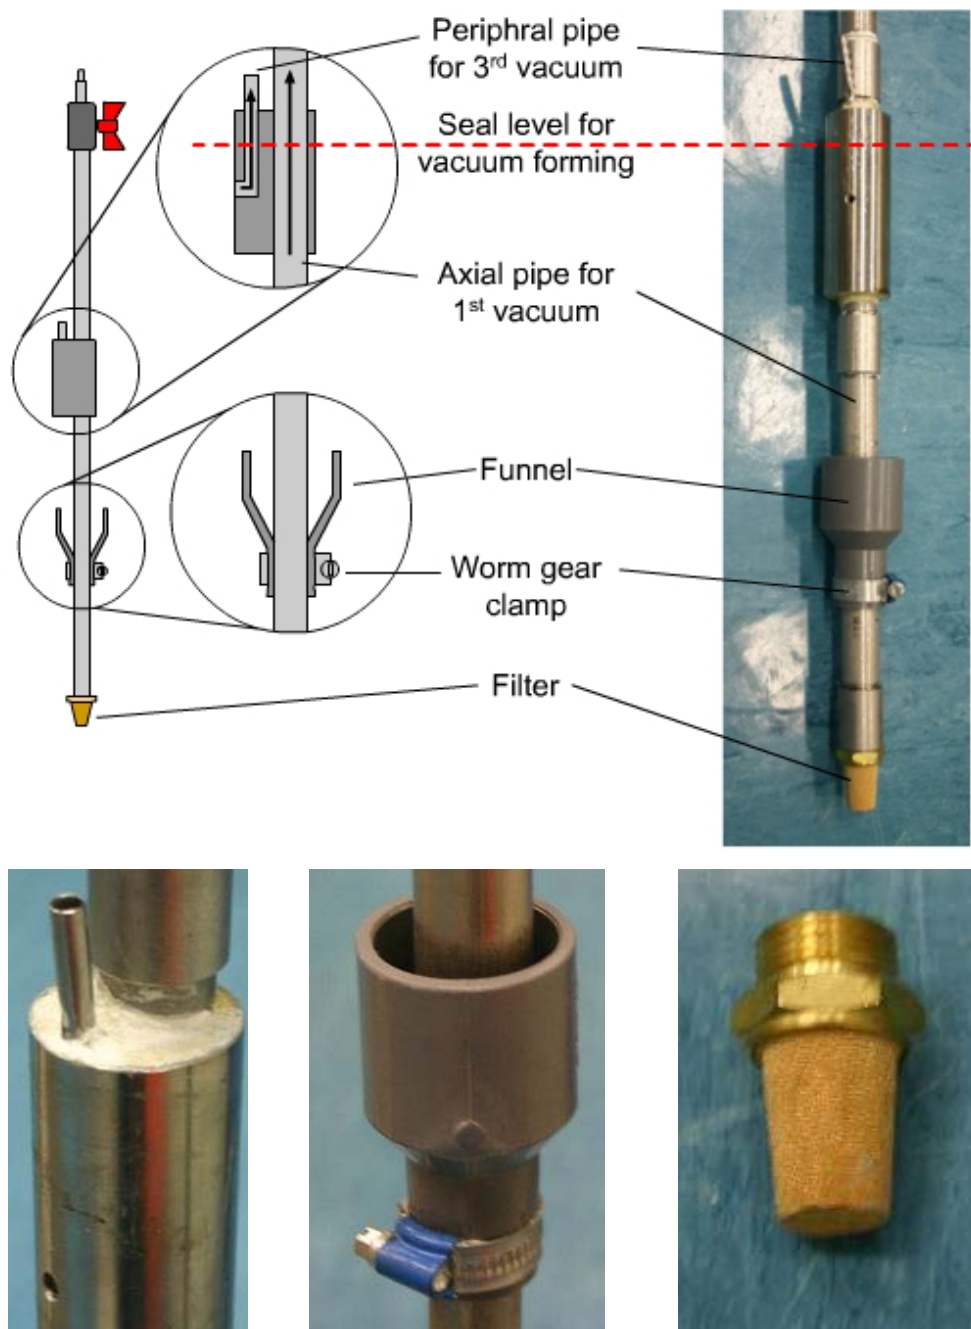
The middle part of casting mandrel consists of 3 metal tubes. The outer largest metal tube embraces the axial and L-shaped air pipes for first and second vacuum processes respectively. The connection of the tubes can be achieved by plaster or polyurethane foam available in prosthesis workshop. The funnel and filter are off-the shelf products for water pipe connection and noise reduction in pressurized gas systems respectively.
